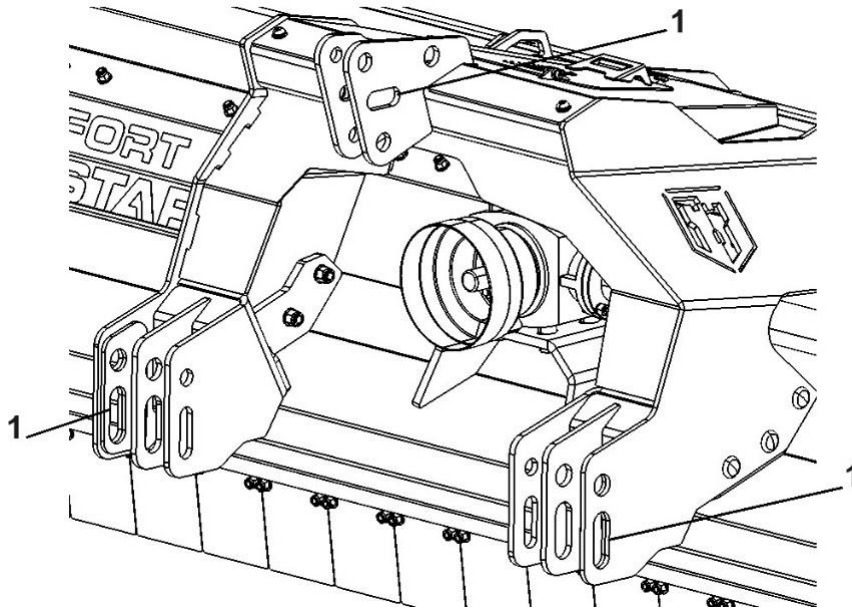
Floating position of the machine: 1 – holes in the three-point linkage provided for operation of the machine in the floating position
